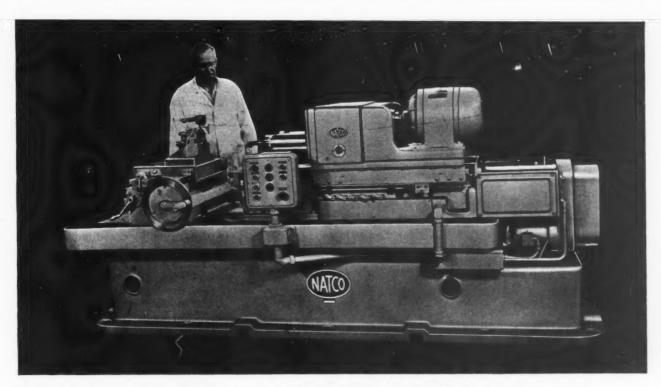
Natco Machine Equipped with Electronic Feed Unit
